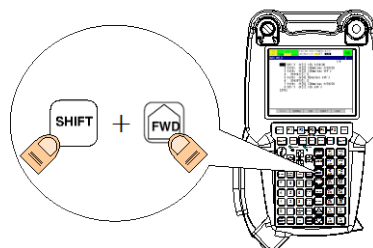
(c) Continuous Operation of Weld Program
